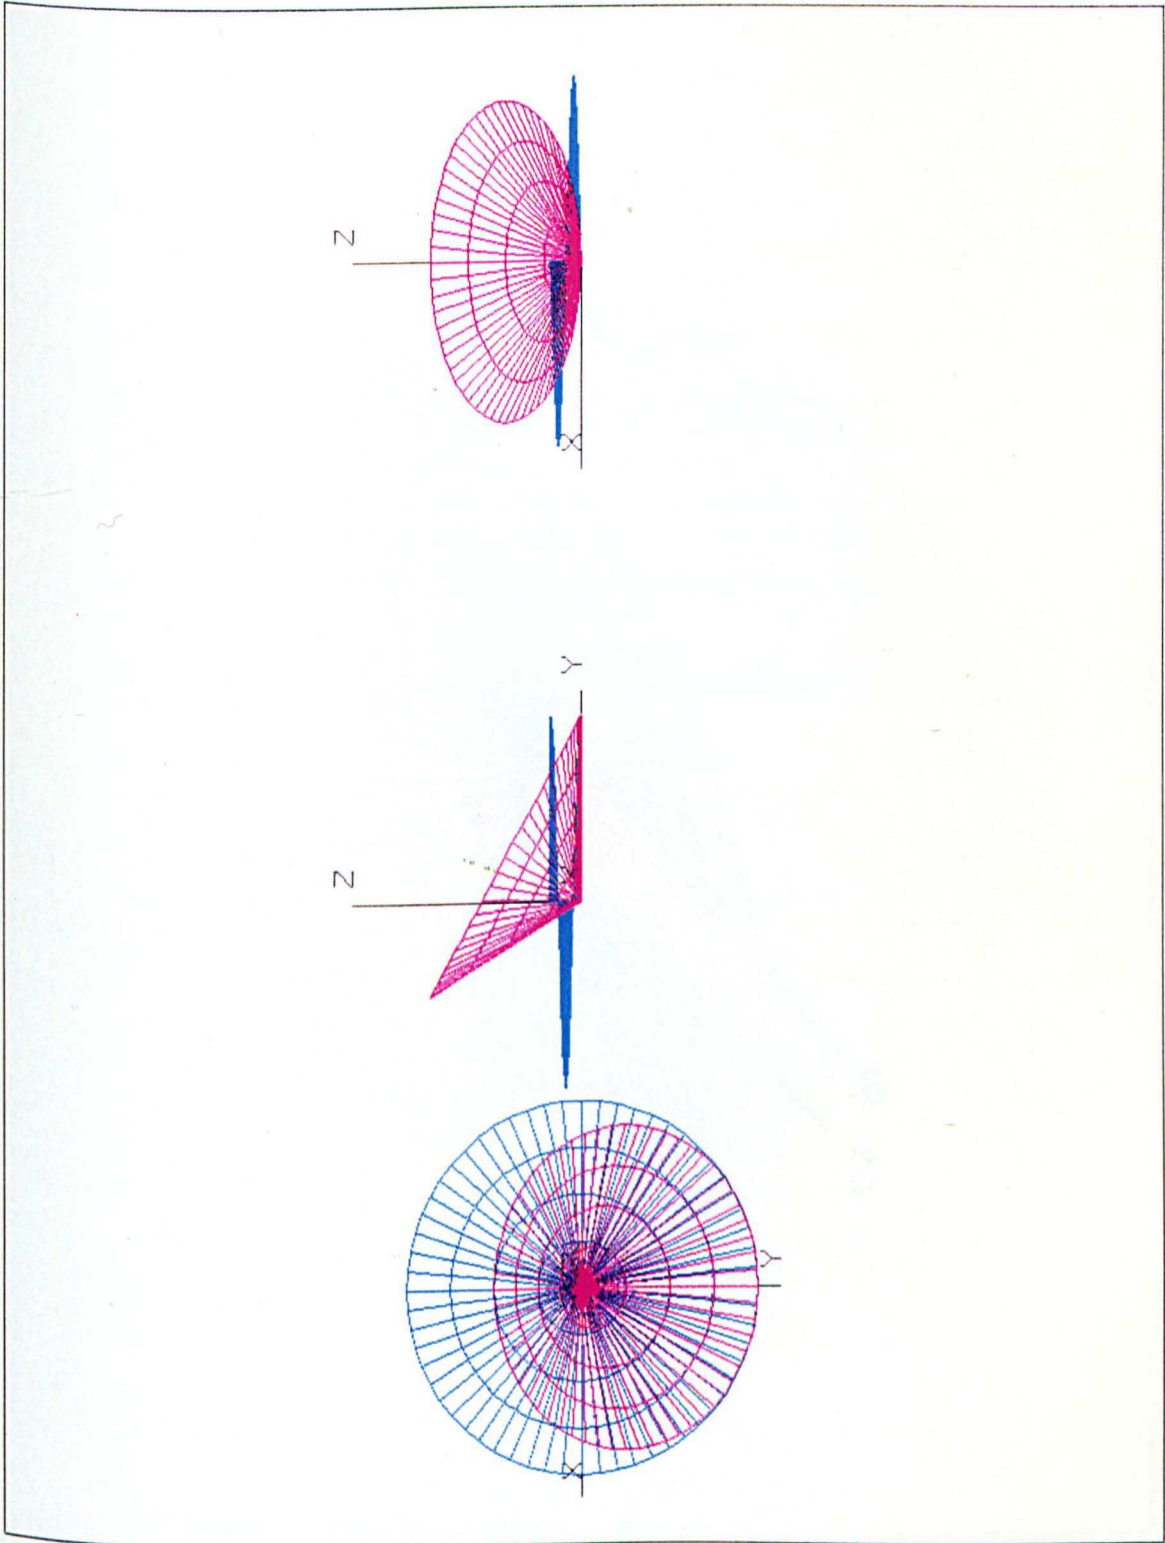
An isometric view, showing superposition of a simulated conic tool on a spiral surface.
